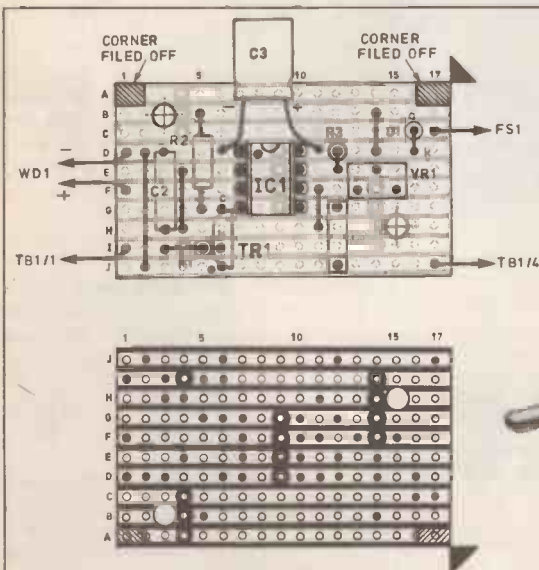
Stripboard component layout and details of the breaks required in the underside copper tracks.
